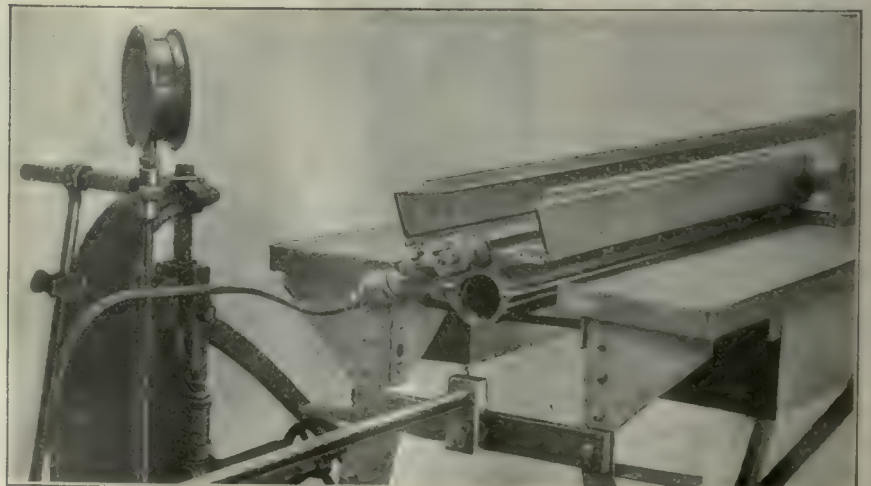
TESTING THE FORGINGS AT HIGH PRESSURE
